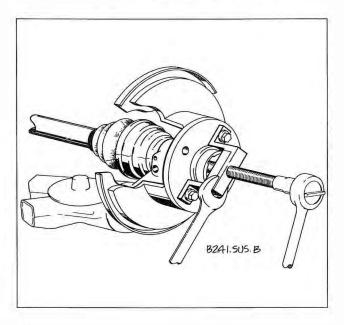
Puller being used to press rear stub axle from wheel hub to remove axle shaft.
